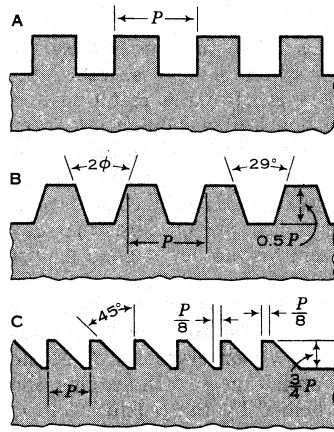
POWER SCREW THREADS. (A) SQUARE THREAD. (B) ACME THREAD AND (C) BUTTRESS THREAD. P, PITCH; φ, PRESSURE ANGLE AND 2φ, THREAD ANGLE
